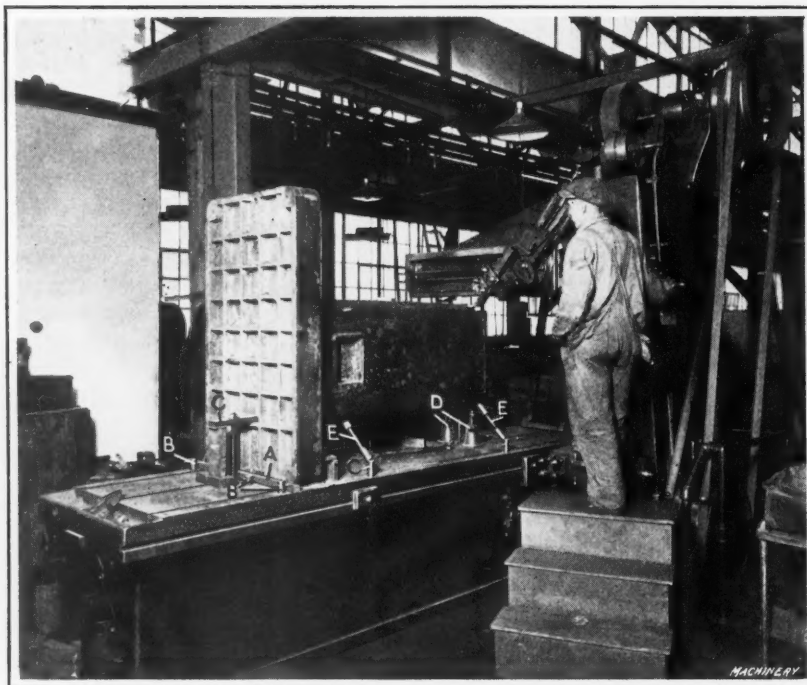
Open-side Planer equipped for planing Knee Bearings on Columns of Milling Machines
